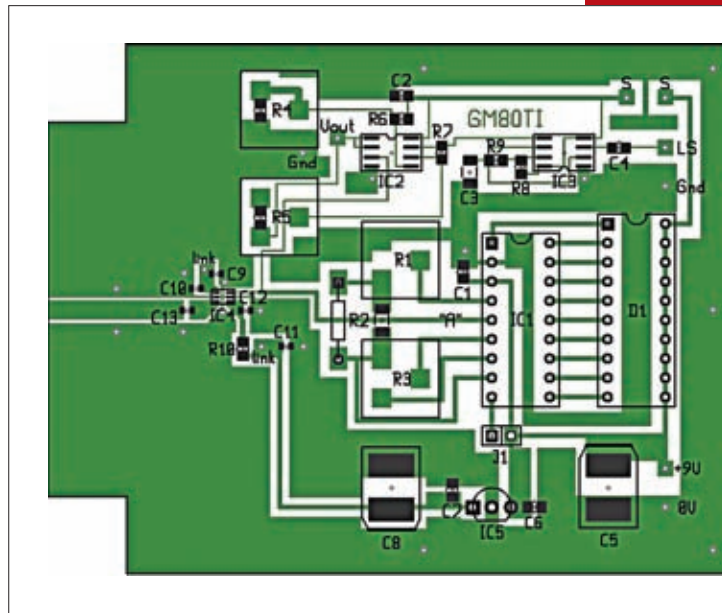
The circuit board layout provided by John GM80TI, is on double-sided p.c.b. material with some connections to both sides of the board.
